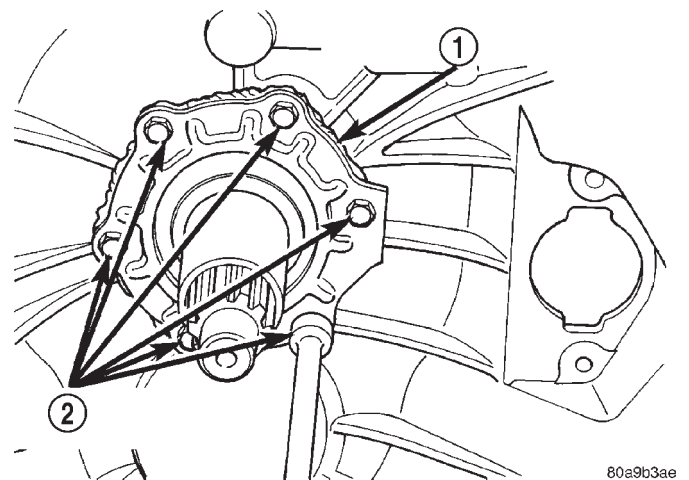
Installing Input Shaft Bearing Retainer Bolts—Typical
